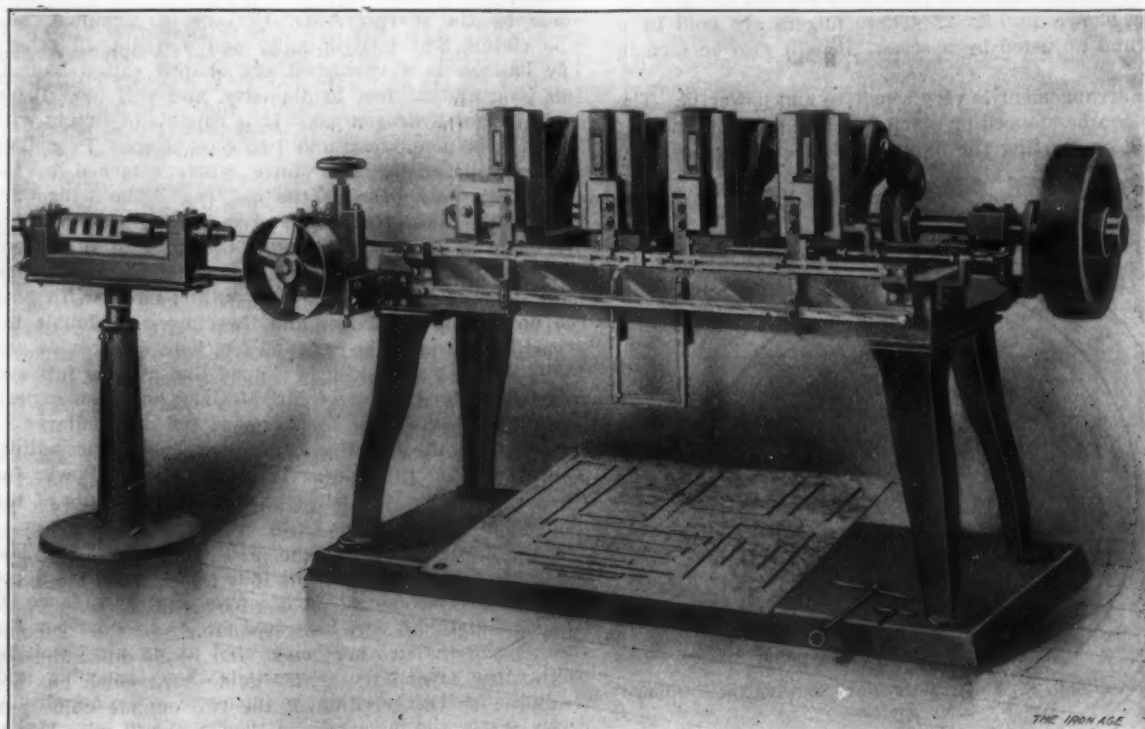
General View of the Machine, with Samples of the Work It Performs Shown Underneath It.
